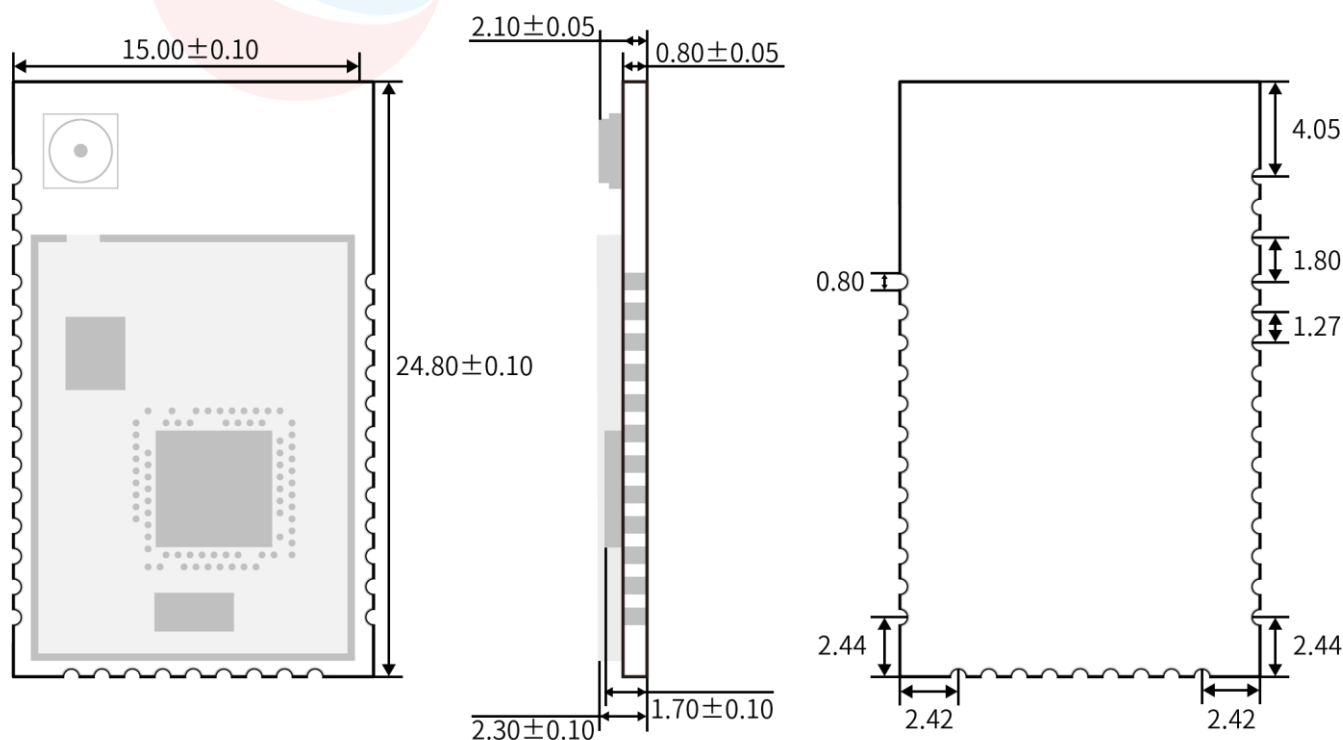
Recommended PCB Footprint of RF-BM-ND05I (mm)
